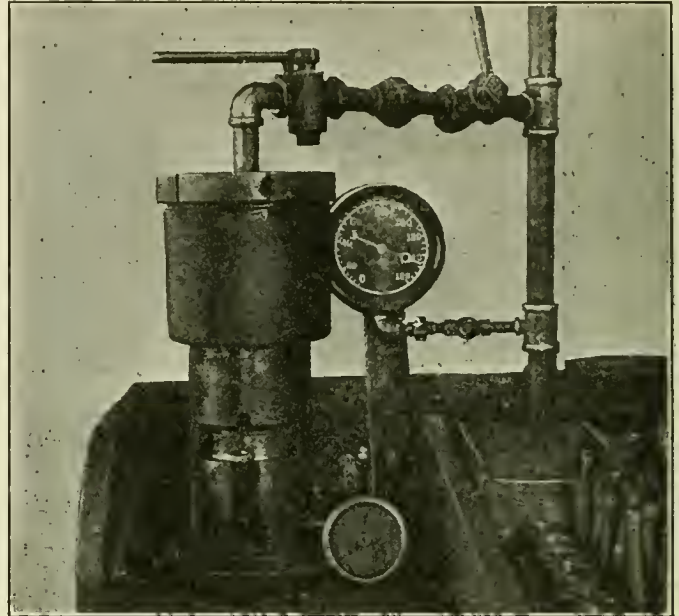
Device for Slightly Closing Triple Valve Piston Packing Ring Grooves
